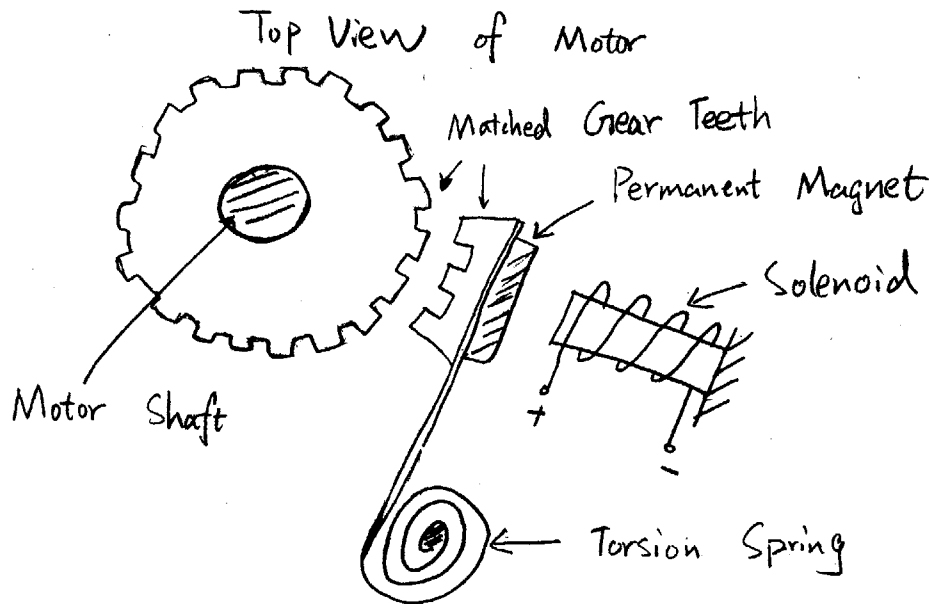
Latch by gear teeth. A gear is attached to the motor shaft and a partial gear with the same meshing is attached to a torsion spring and a permanent magnet.
